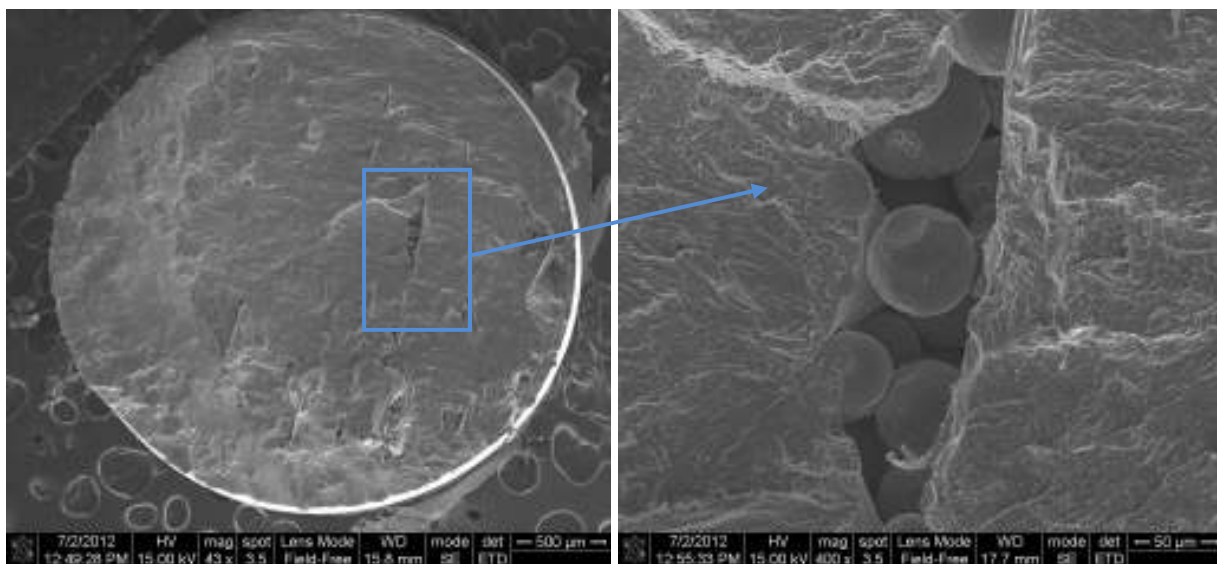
SEM image showing balling defects closer to the lower curvature at the reduced section in a fractured fatigue sample
